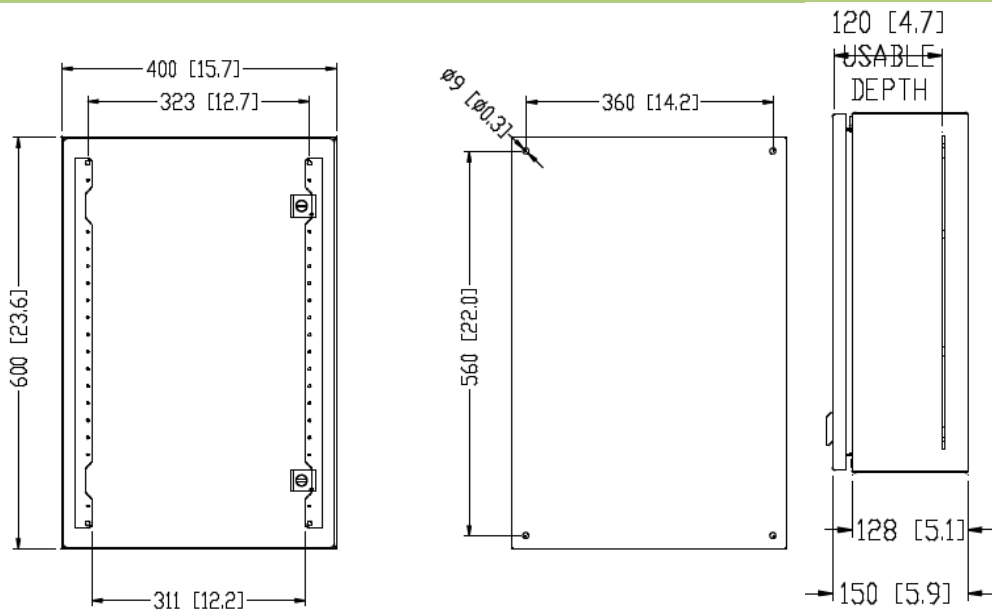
Enclosure Dimensions: Outside, Mounting, Depth
